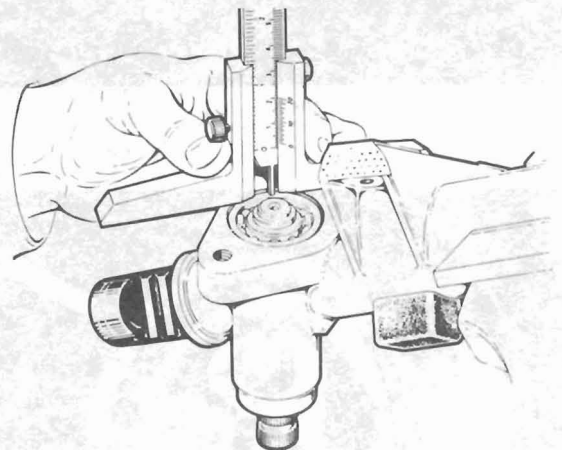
Measuring pinion bearing recess (Sec 17)
